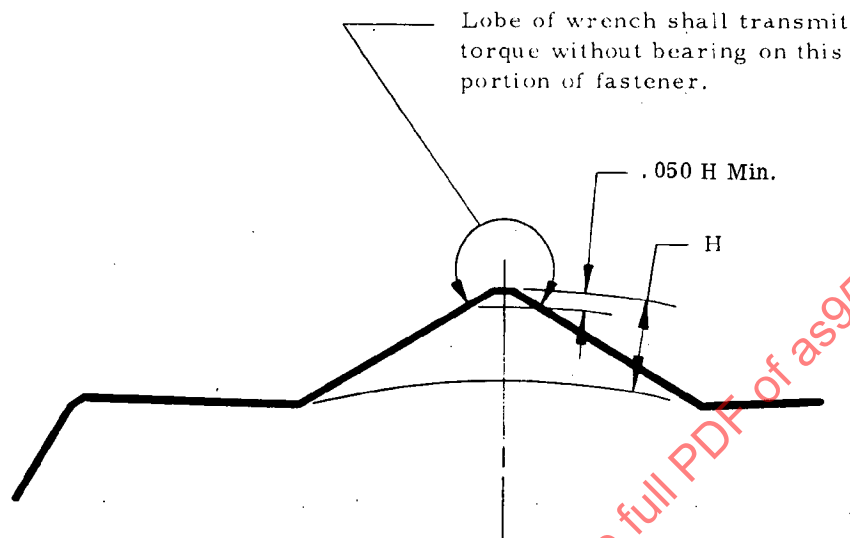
INTERNAL WRENCH ENGAGEMENT
